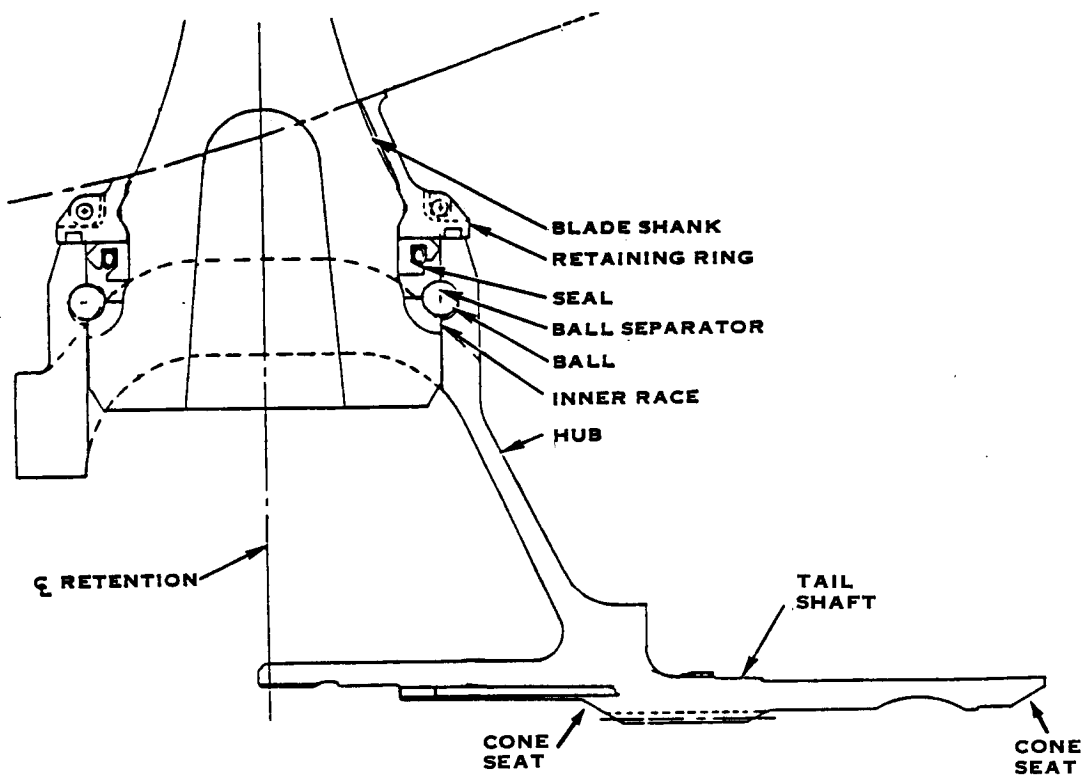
CROSS SECTION, LAP HUB AND BLADE RETENTION
